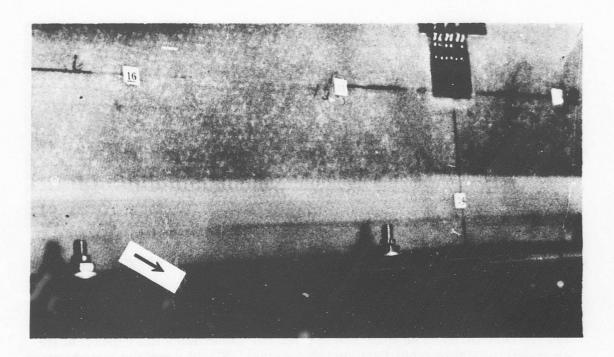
Failure Showing Movement Between Faying Surfaces of Aft Spar Flange and Lower Surface Panel of Box No. 2.
